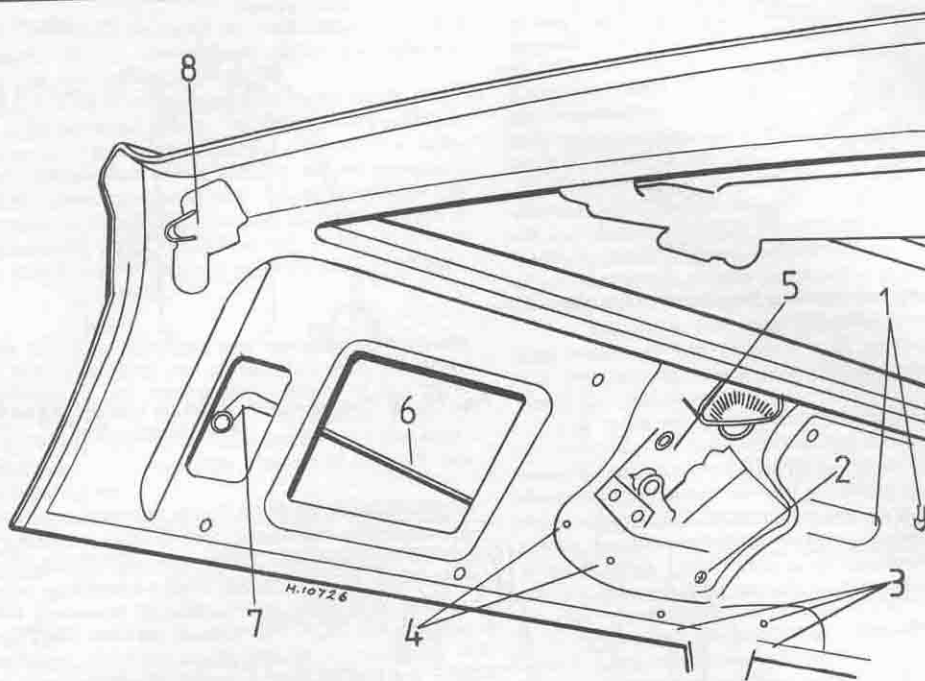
Layout of the tailgate with the Ducellier wiper motor (Sec 53)
